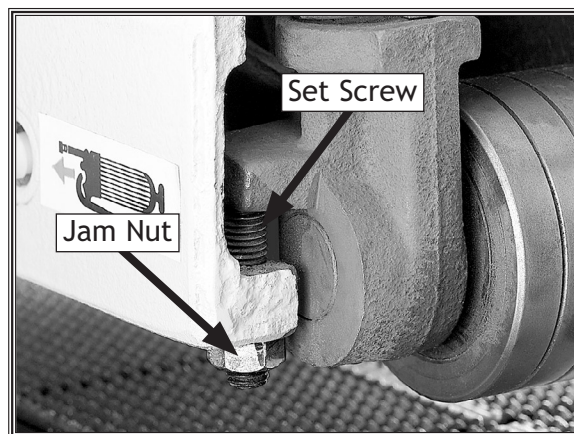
Main pressure roller assembly adjusting jam nut and set screw (two on either side of the blade).
